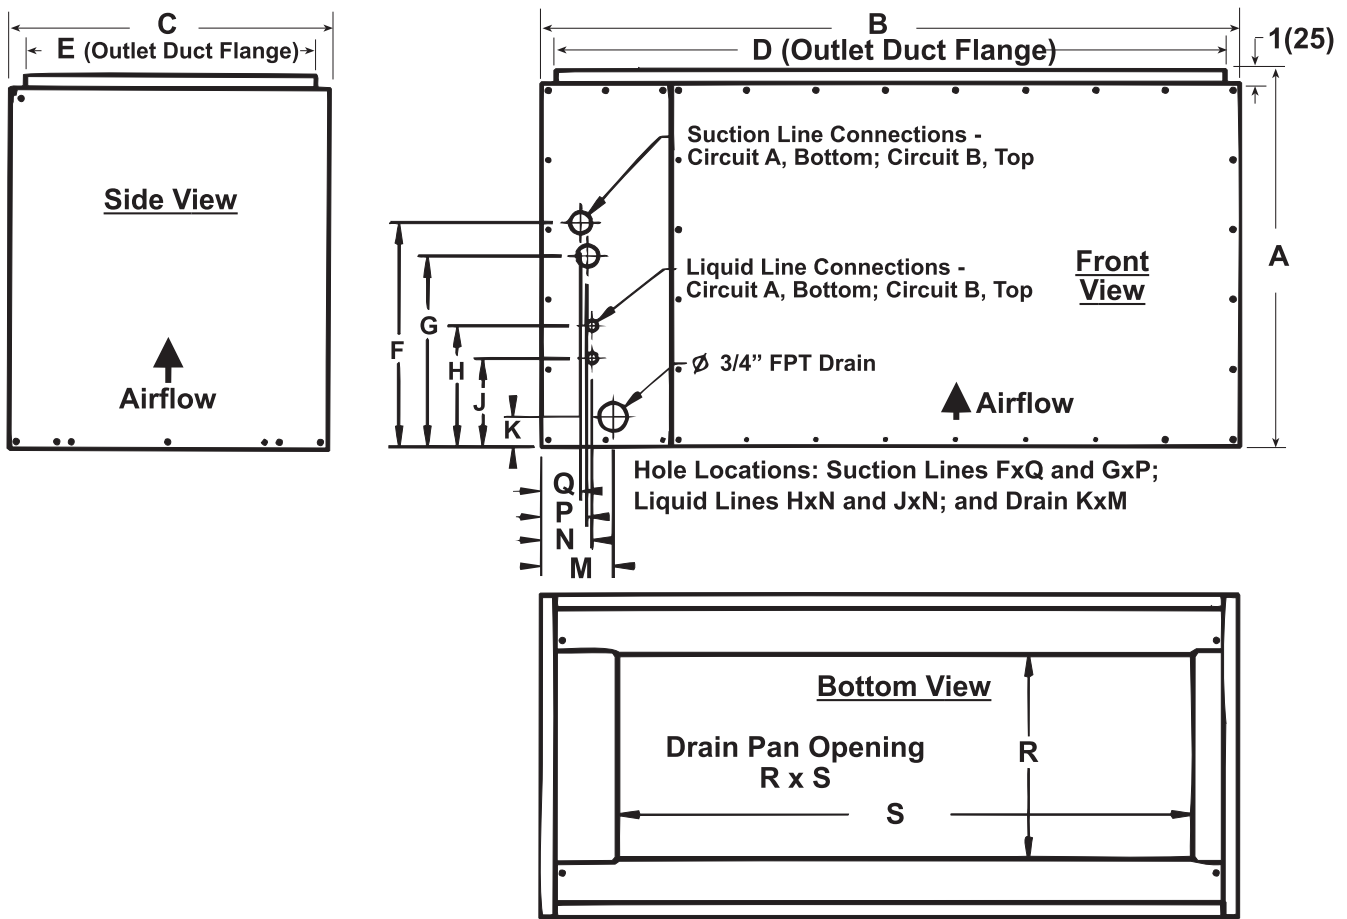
Cased Cooling Coil Dimensions (Refer to Table 4)
